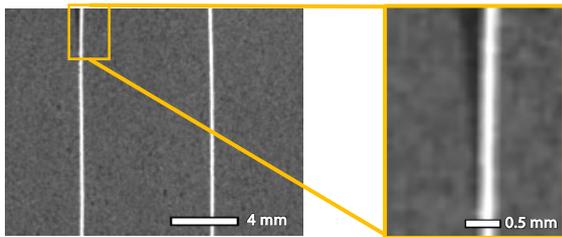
Cross-Sectional Image of Overall Adhesive Area
